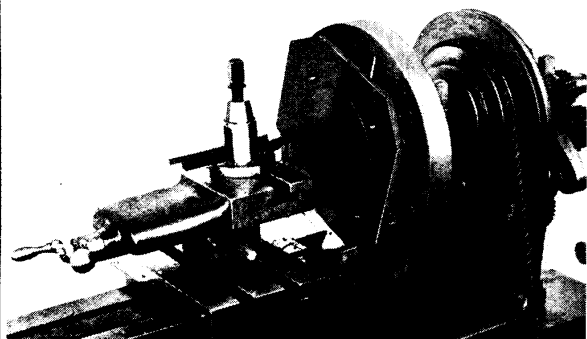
Mounted on the face plate of the lathe is a sheet of ebonite, and the centre is being cut out to make a disk
